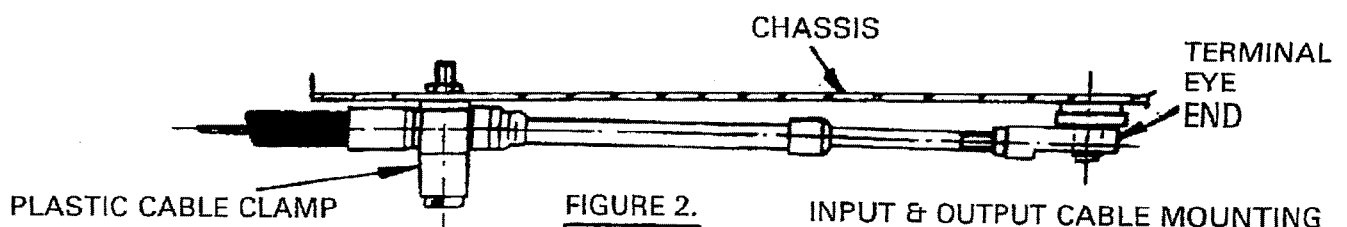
INPUT & OUTPUT CABLE MOUNTING
